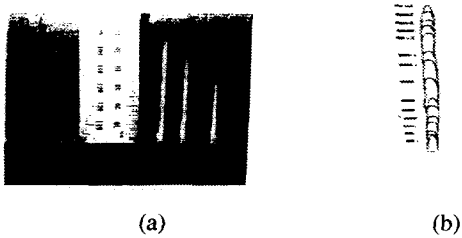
(a) Shape of Drilled Holes By Experimental work (b) Hole drilling Shape with Abrasive Waterjet^[28]
